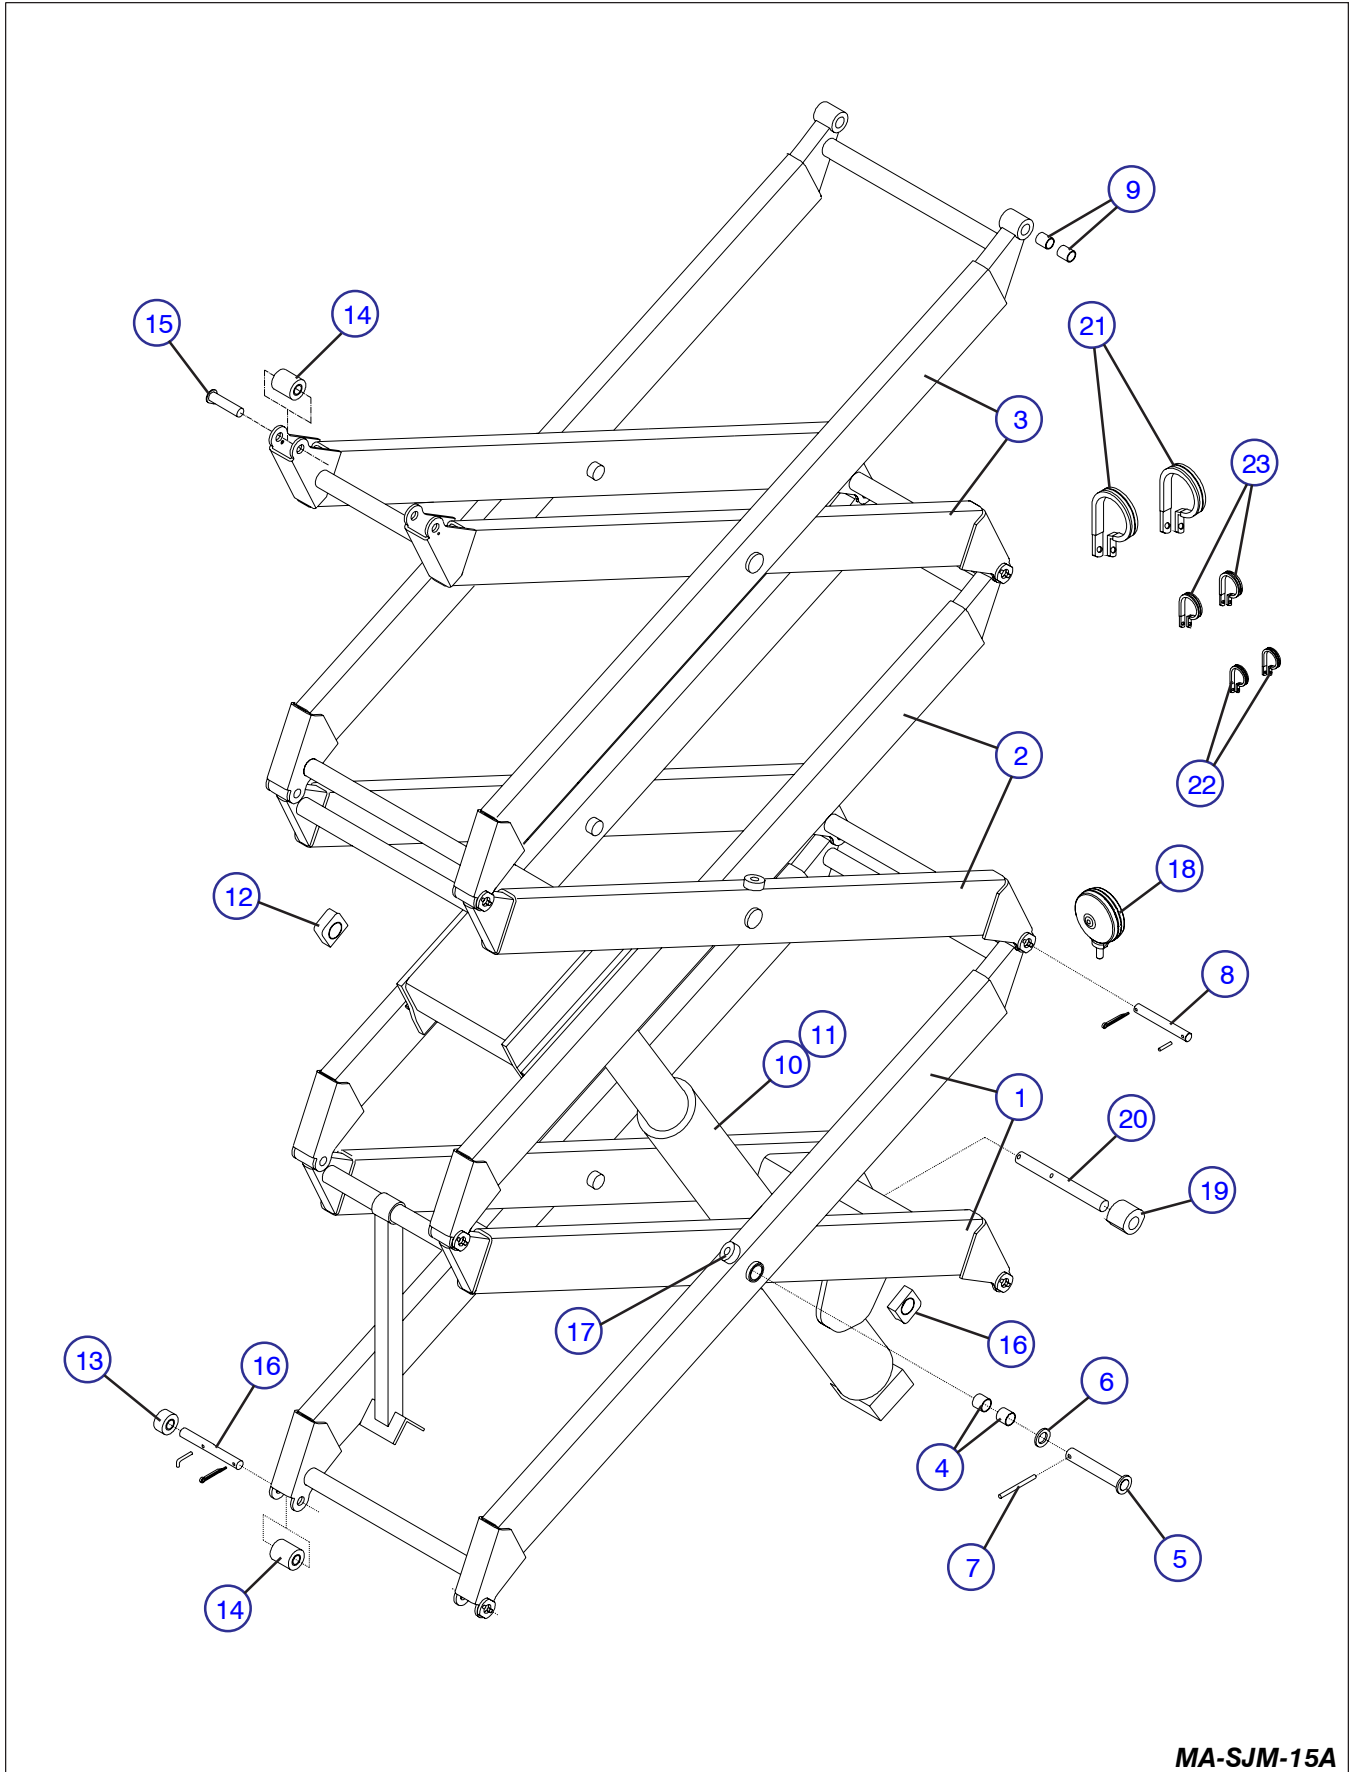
B. HYDRAULIC HOSE CONNECTIONS - Scissors
